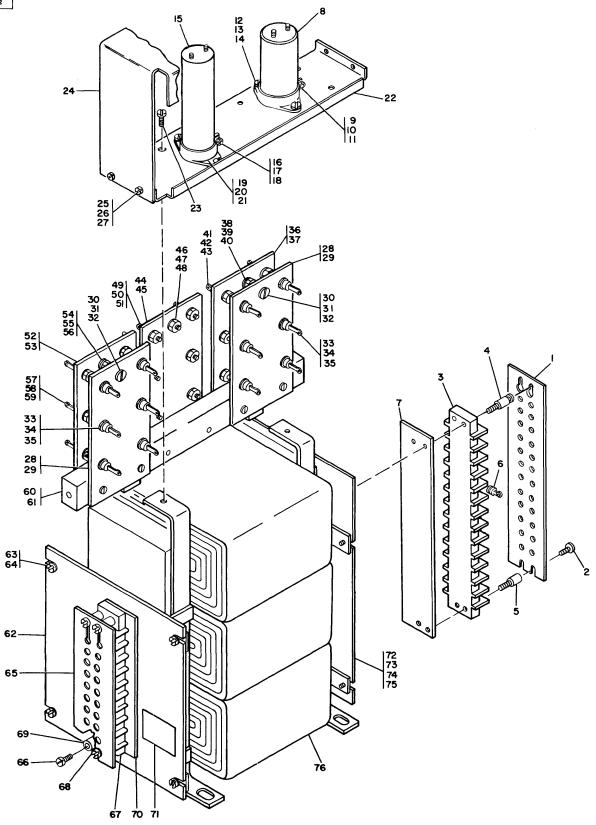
A. TRANSFORMER - RECTIFIER ASSEMBLY. SEE LIST 11A
